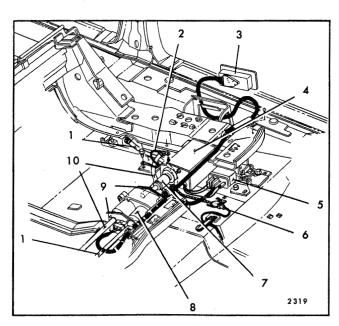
Four-Way Bench Seat Wiring -"B & C" Body Styles
